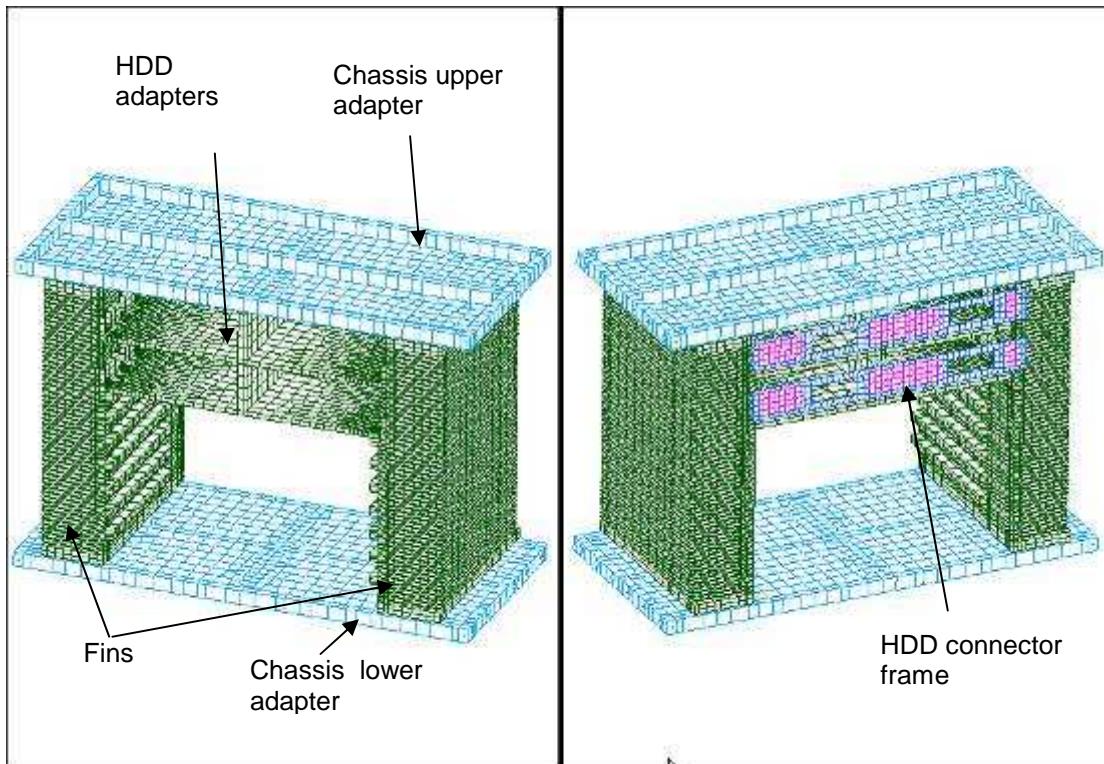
CHASSIS ASSEMBLY FE MODEL
